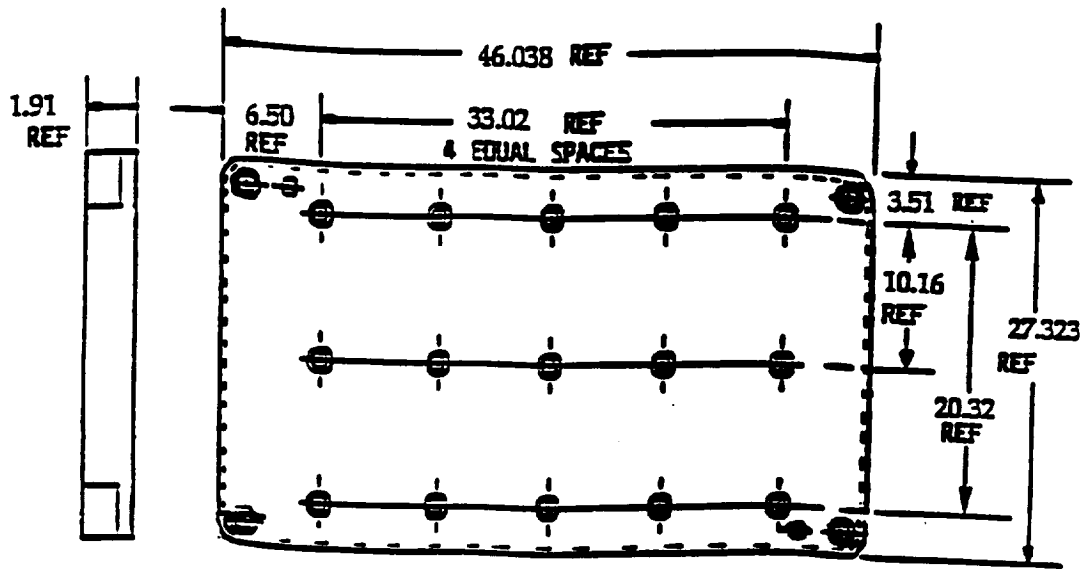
The single adapter plate [1]. All dimensions are in cm.
